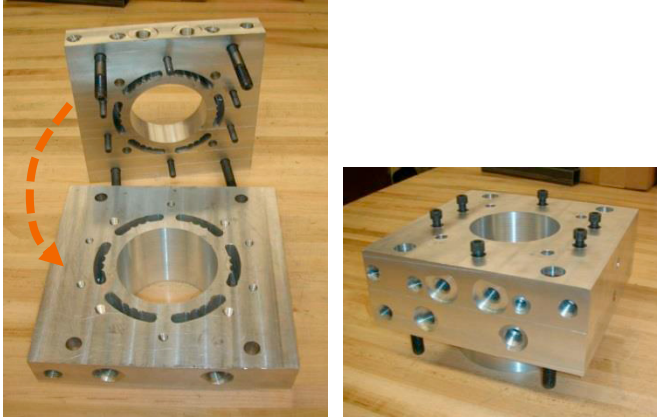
Interior of block showing six coolant zones (left), and assembled exterior with coolant & thermocouple access (right)
